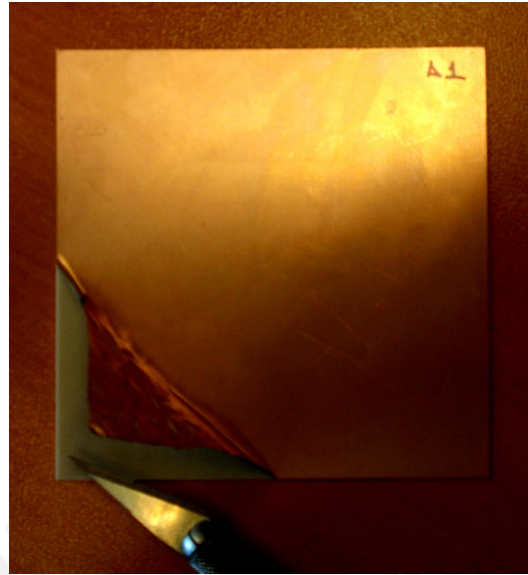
Removing the unwanted copper using a cutter and following the marks made by the milling machine, now is removed all the copper from the back side of the patch.
